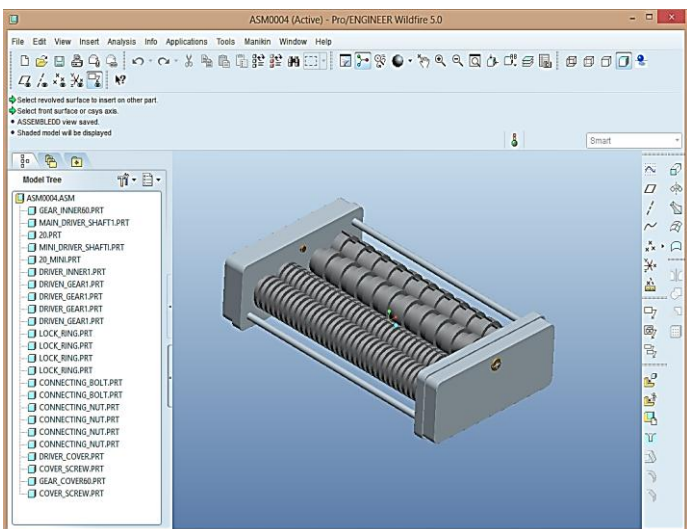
Cutting shaft assembly of the machine as viewed from the gear compartment side
